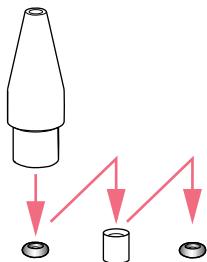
Cross section with correctly positioned o-rings and spacing sleeve
